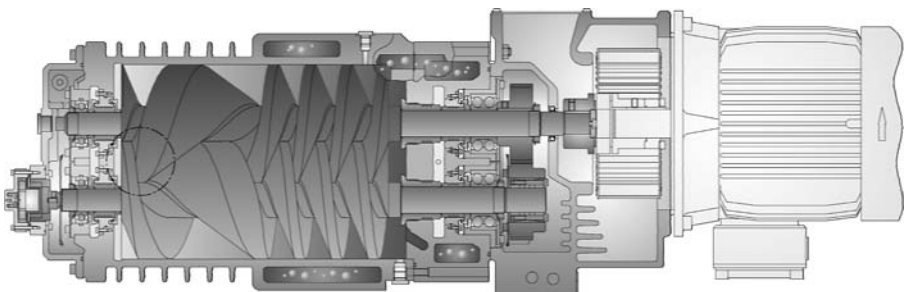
Section through a screw vacuum pump, Dr.-Ing. K. Busch GmbH
